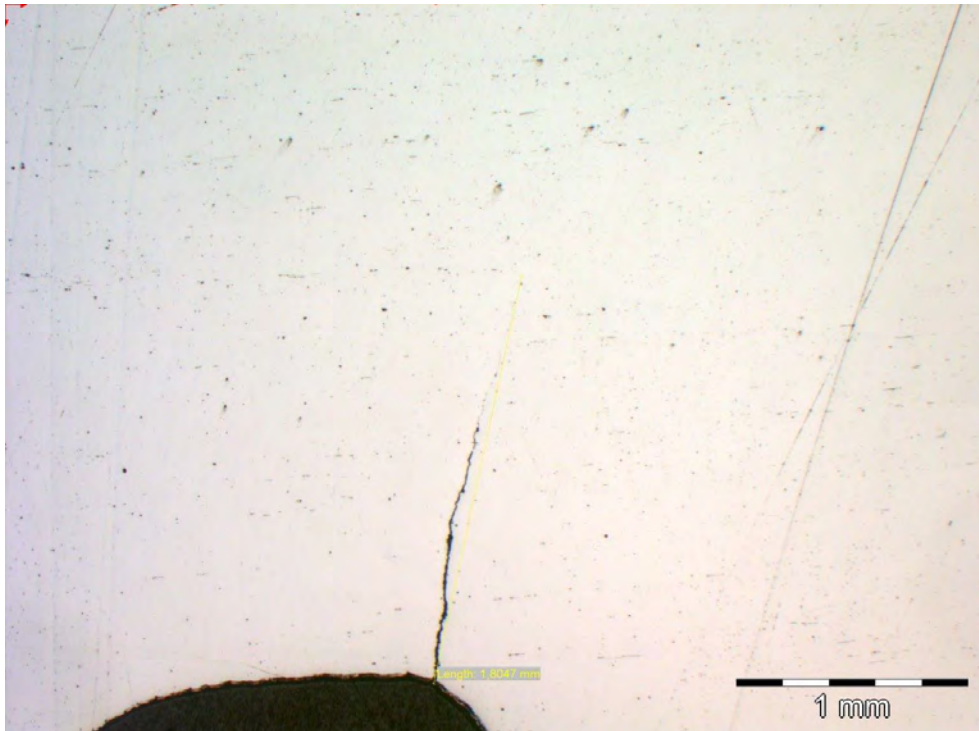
Cut six in crack at segment A, first ridge on barrel no. 14389
